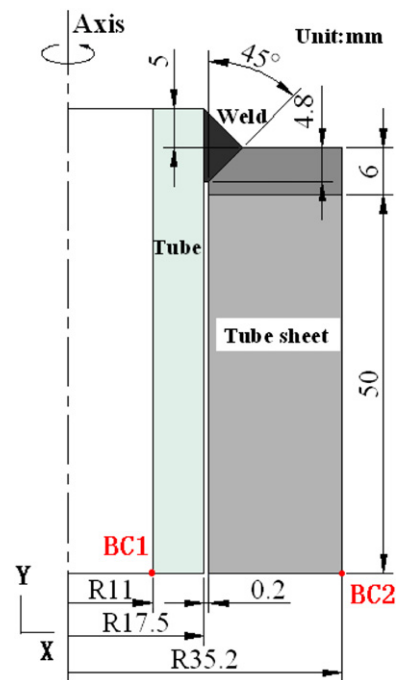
The geometrical model of tube to tube sheet weld.
